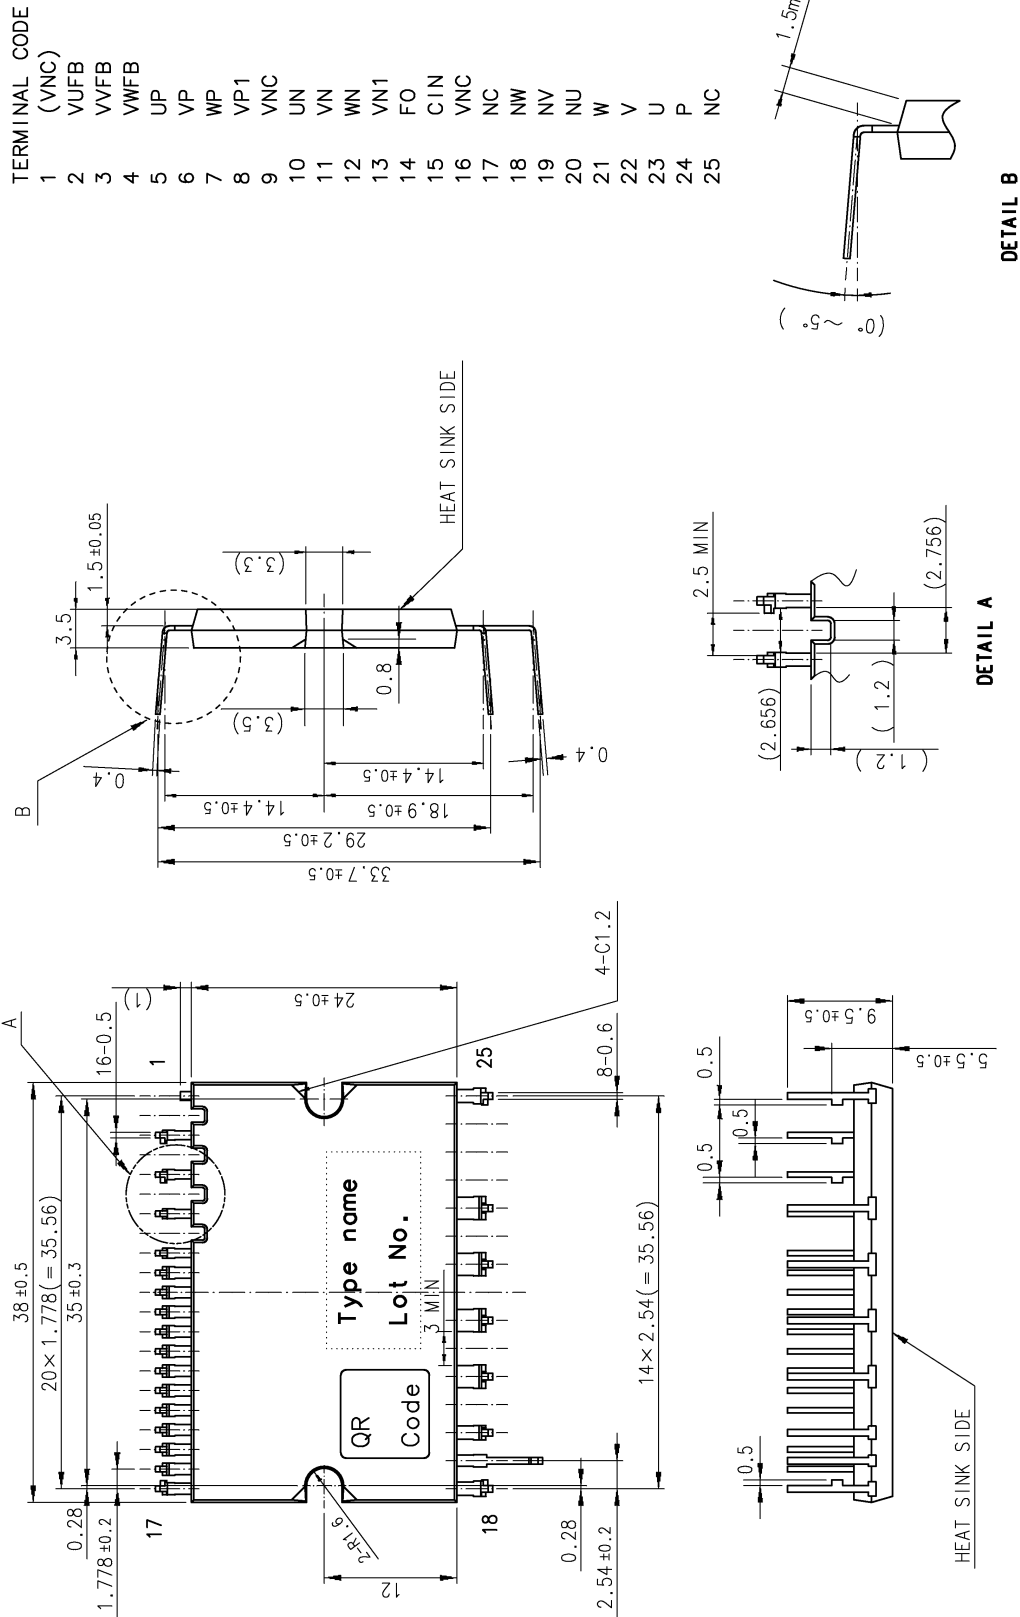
N-side open emitter type package(-4S/-ST) outline drawing
